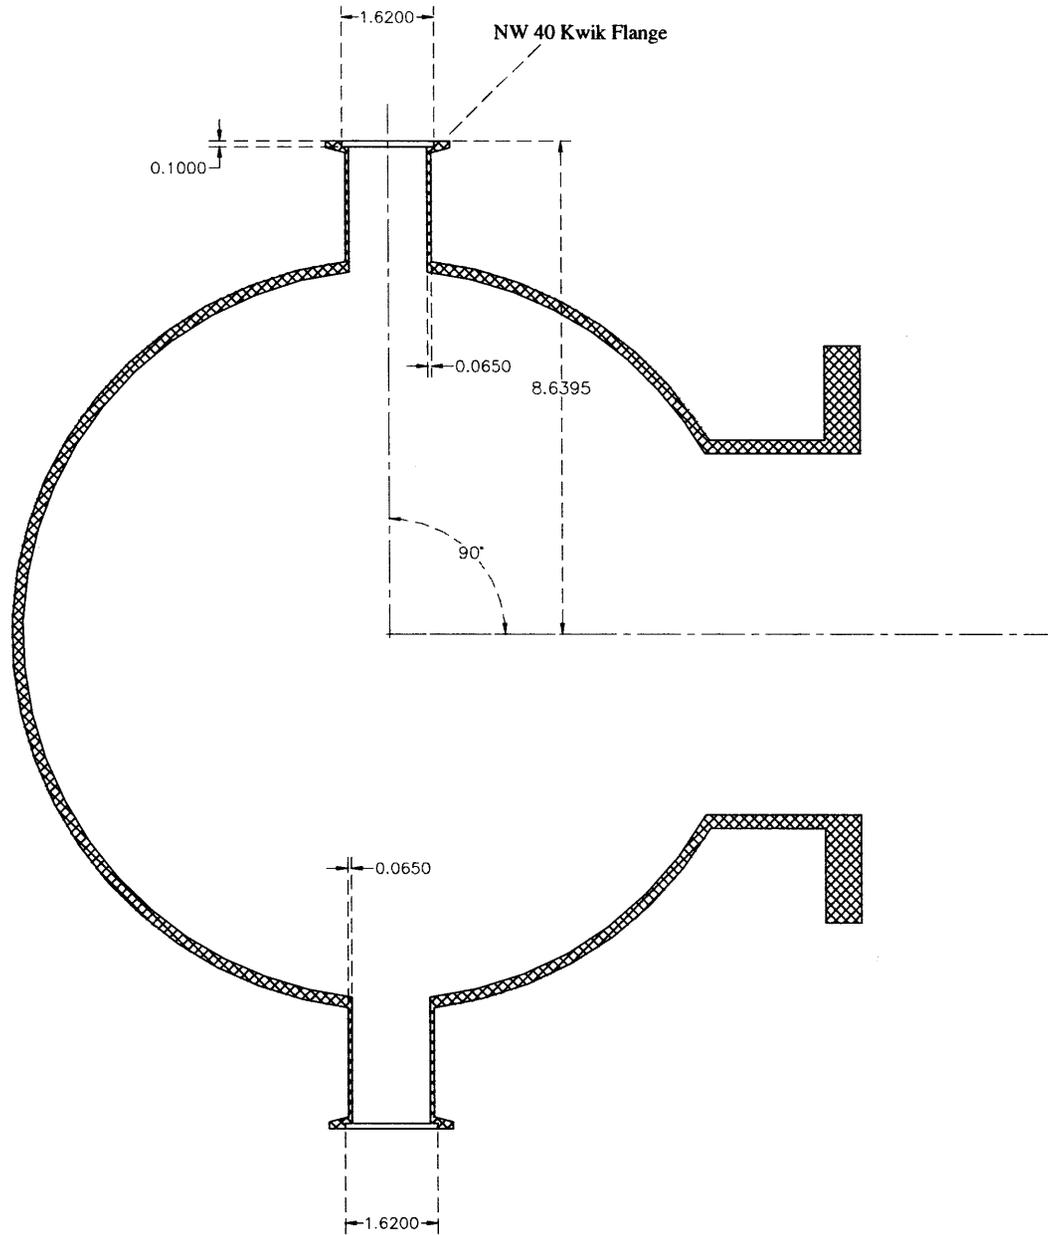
Top down cross-section @ 13.4375 in. down from bottom of top flange
